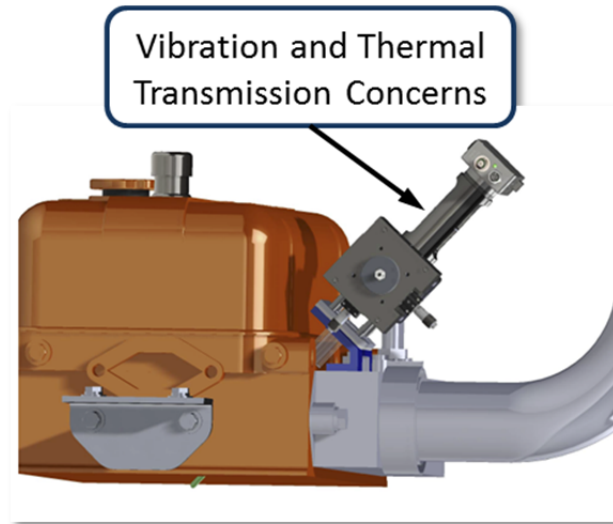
Solidworks model of original design showing optics mounted on the instrument bracket.
